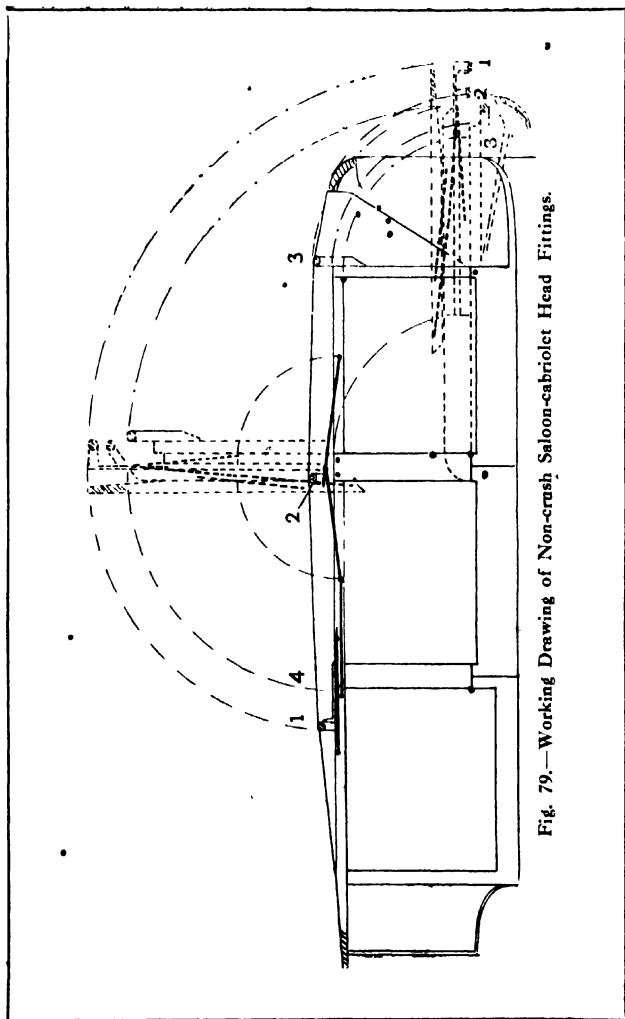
Working Drawing of Non-crush Saloon-cabriolet Head Fittings.
